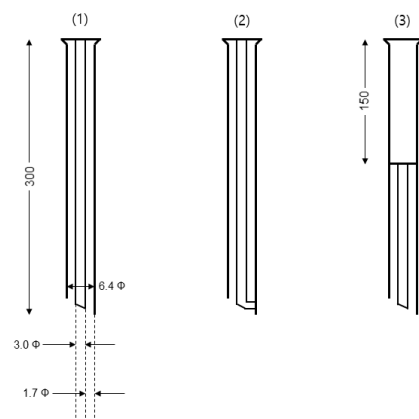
Design of the quartz mold for annular fuel fabrication.
